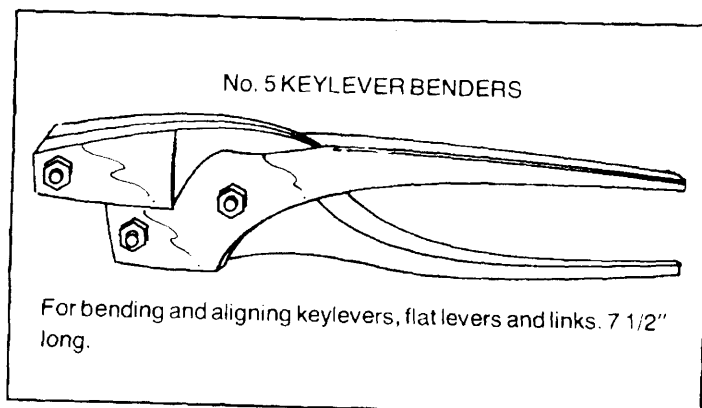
This special typewriter tool can bend levers and links back into alignment (courtesy of Ames Supply Company).
